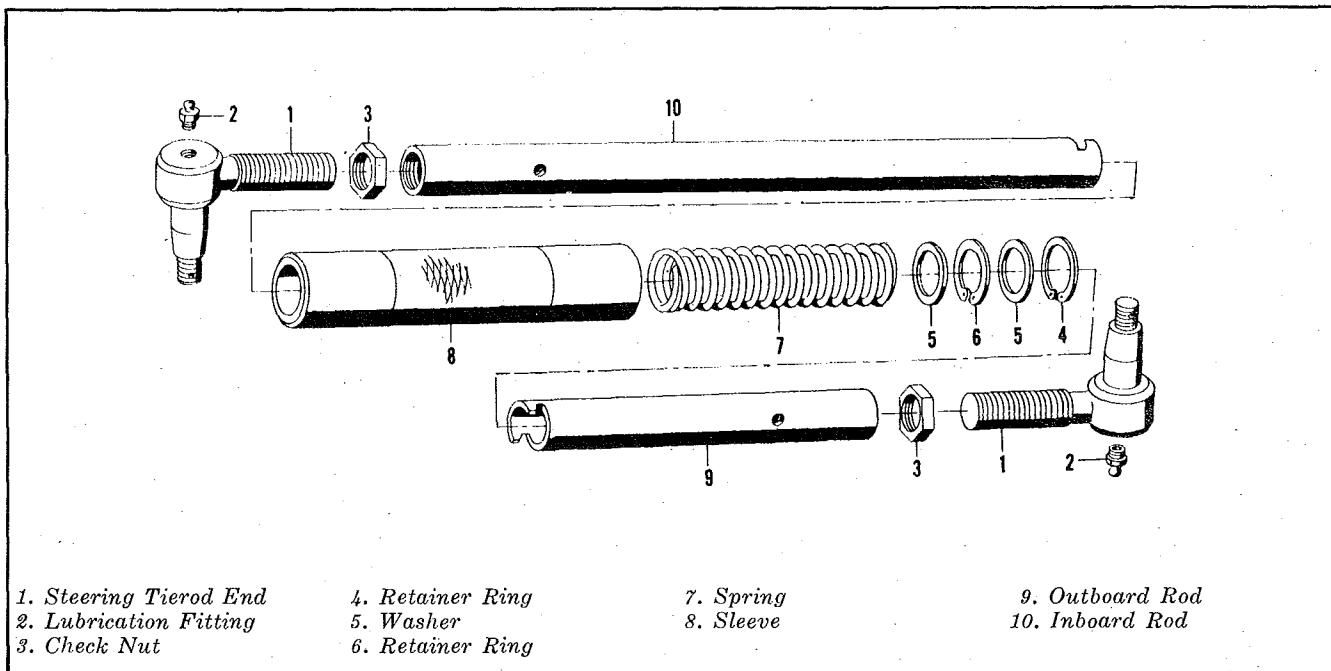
Steering Tierod Assembly, Part Nos. 111407 and 103006
